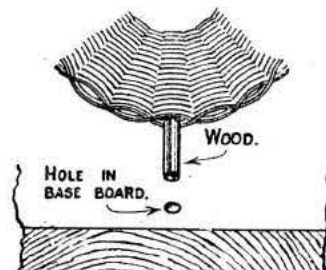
Showing how the basket coils in the plate lead are mounted.
